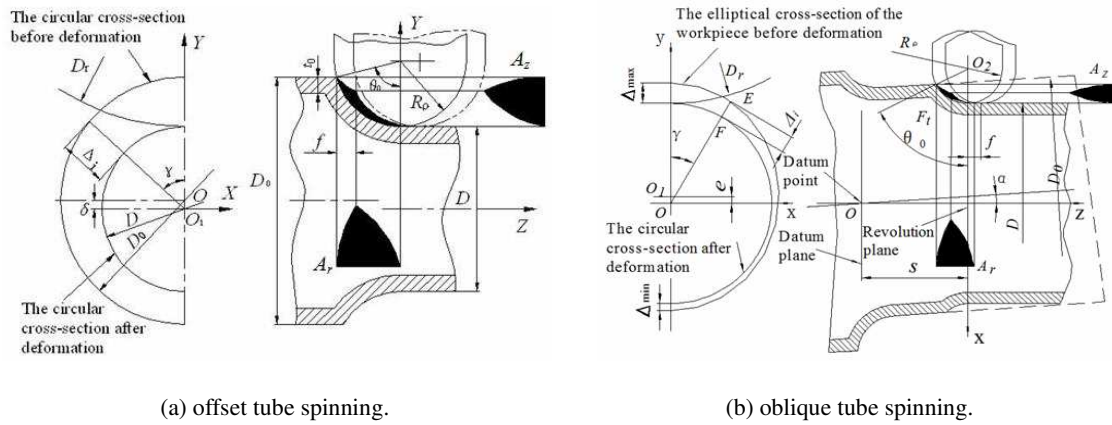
Projective contact areas between roller and workpiece [22, 23].
